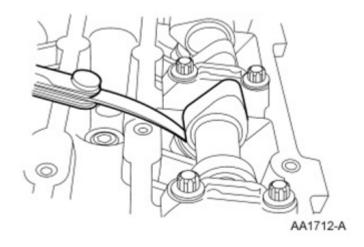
Measuring Valve Clearance Before Removing The Camshafts Courtesy of FORD MOTOR CO.
